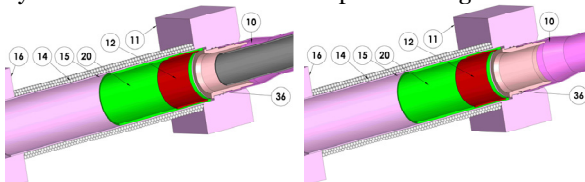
Schematic representation of the channel before and after pressure tube extracting
